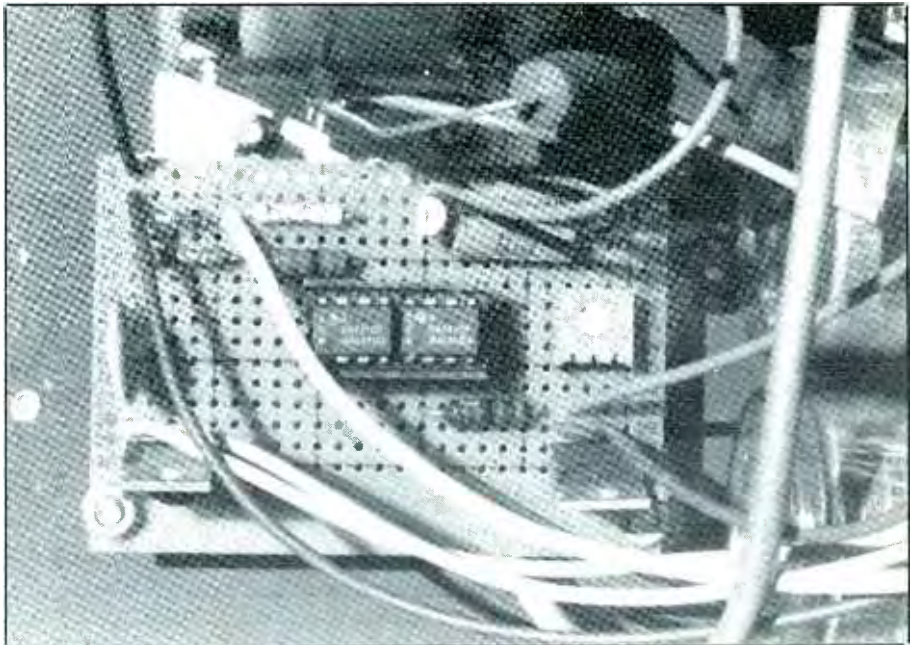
A close-up view of the small circuit-board assembly on which the active circuitry is mounted and wired.
